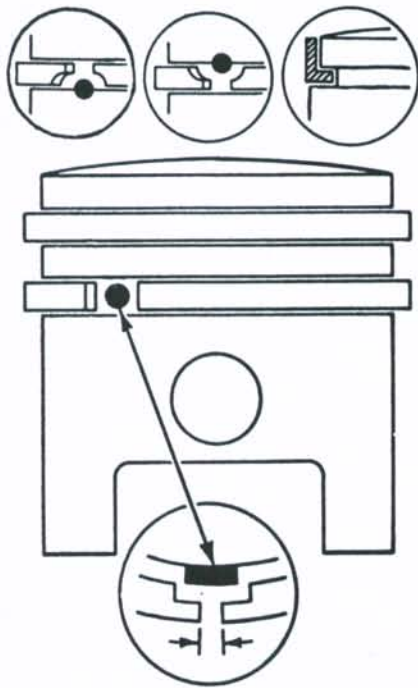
Various locations of piston ring positioning pin have been used as shown. L-ring (upper right) is used in top groove on K295-2T and all axial fan models.
